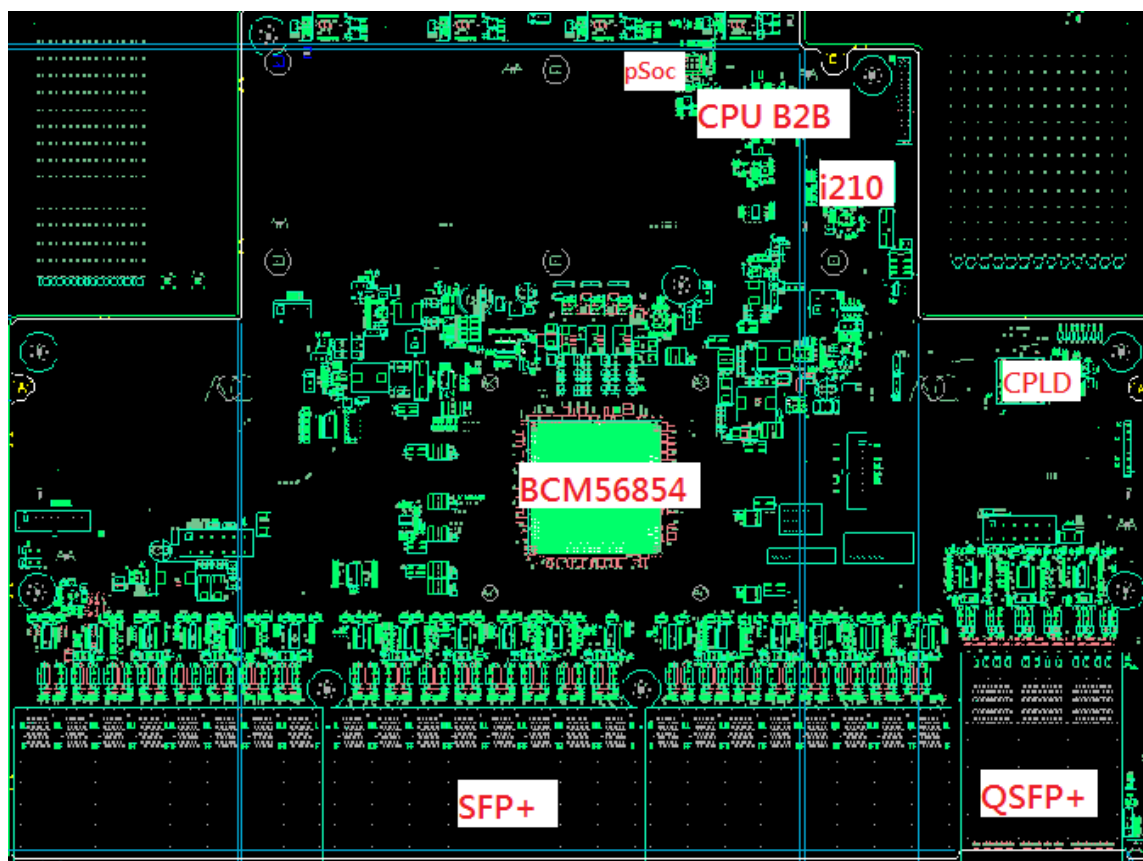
Inventec DCS6072QS Switch PCB Top View With Major Components Highlighted
